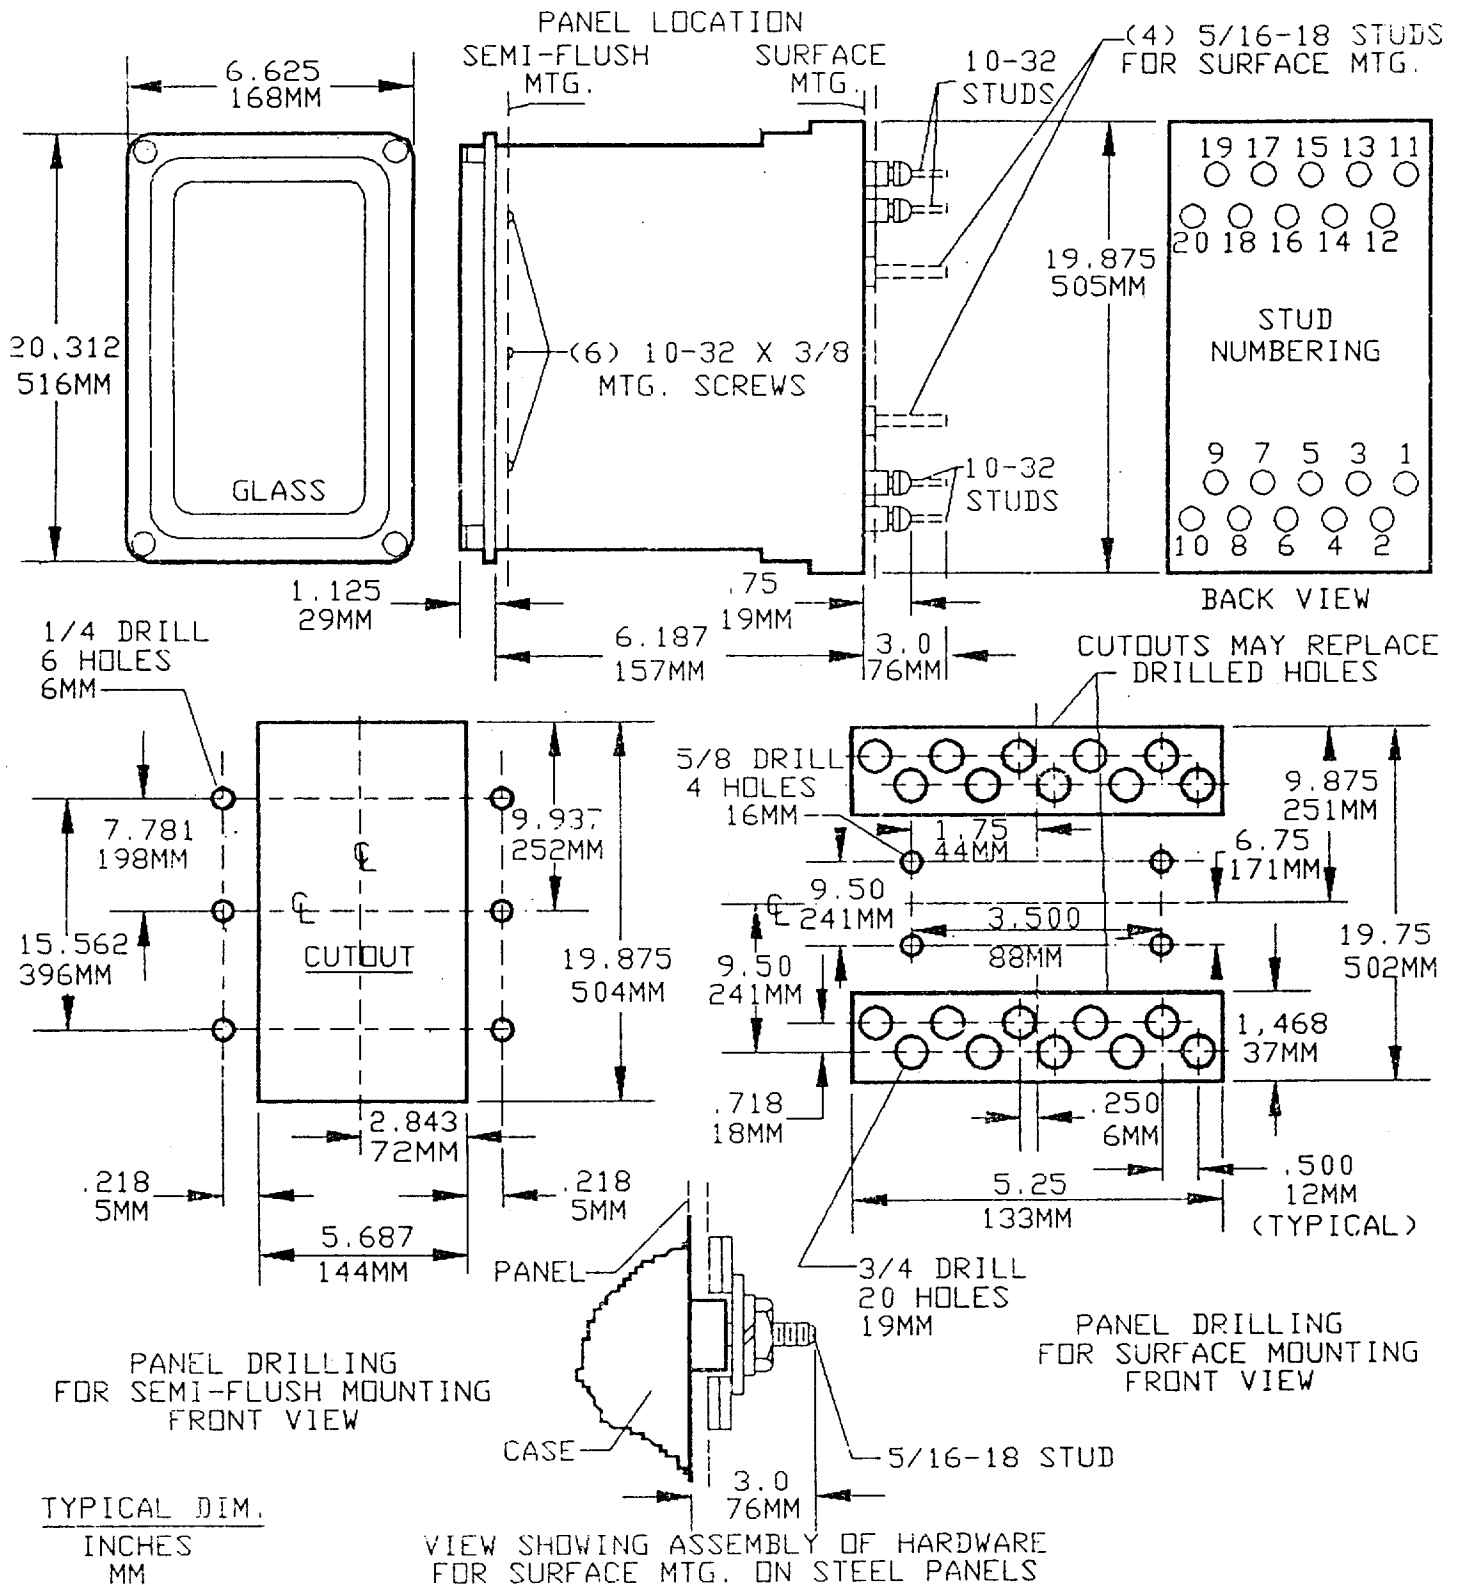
(6209276 [5]) Outline and Panel Drilling Dimensions for Relay Type BDD178.
